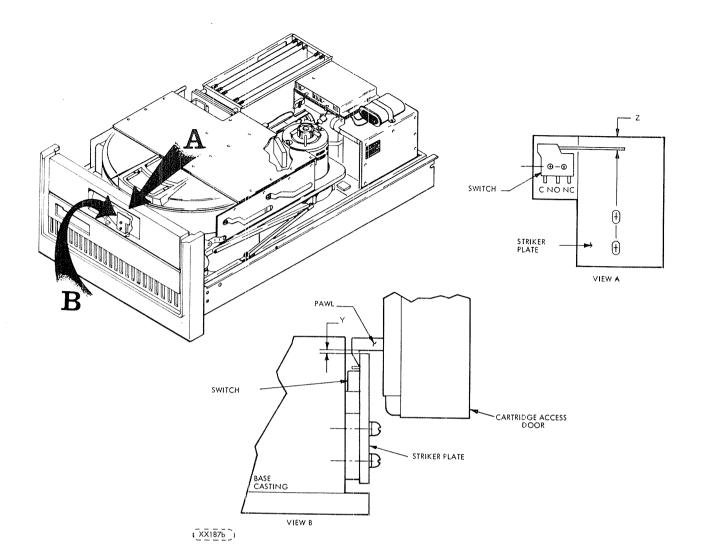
B. DECK DOWN INTERLOCK SWITCH ADJUSTMENT
